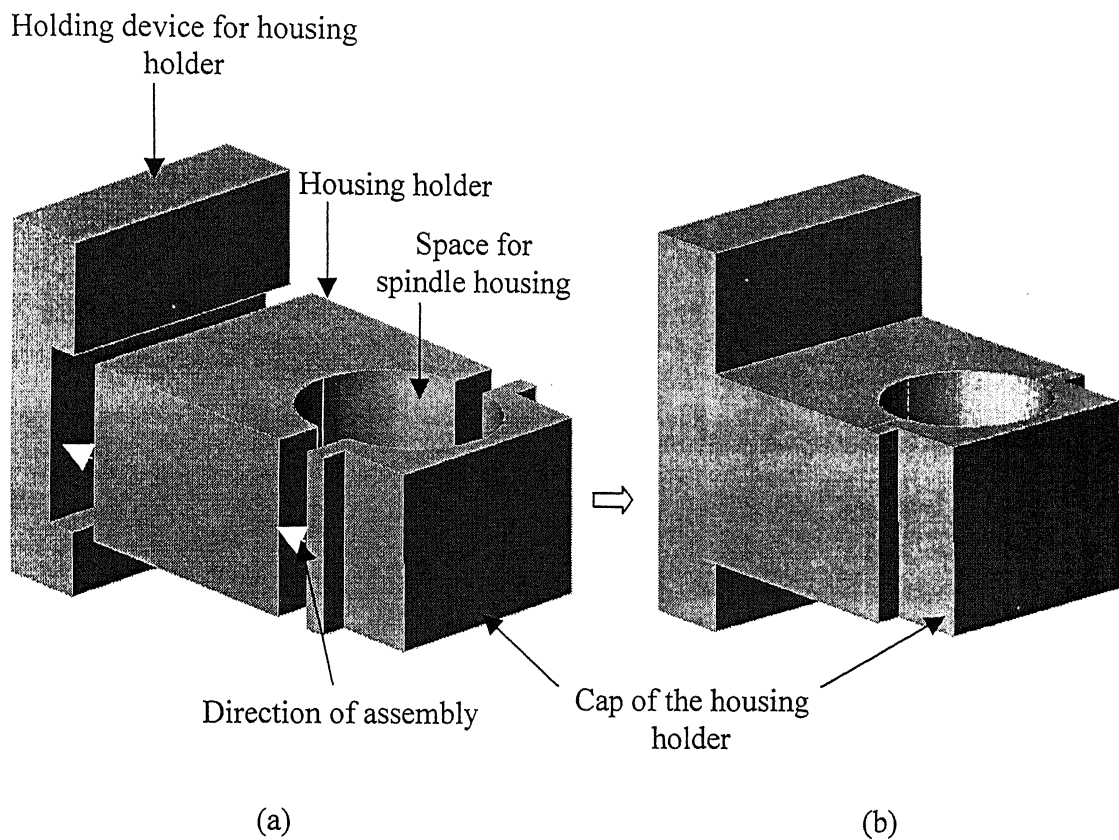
(a) Spindle housing holder and the holding device for the housing holder, before assembly
